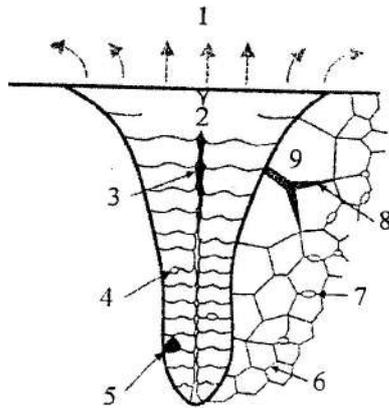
Schem of welding joining of high nitrogen steel: 1 – nitrogen losses from welds; 2 – welds metal; 3 – crack initiation; 4 – chromium nitrides in welds; 5 – pore initiation; 6 – grain boundary; 7 – chromium nitride in heat affected zone of weldments; 8 – lievation crack initiation; 9 – heat affected zone.
